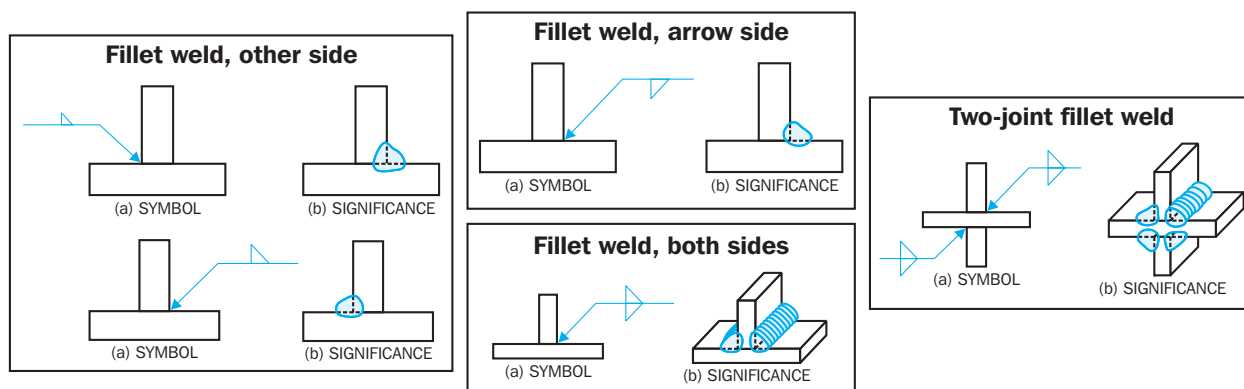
In these basic welding details, the reference line points to the location of the weld. The weld (type) symbol is properly located above or below the reference line to note on which side to place the weld. There are also examples of multiple welds on opposite sides. (Adapted from Shanghai Jiao Tong University, Shanghai, China)
